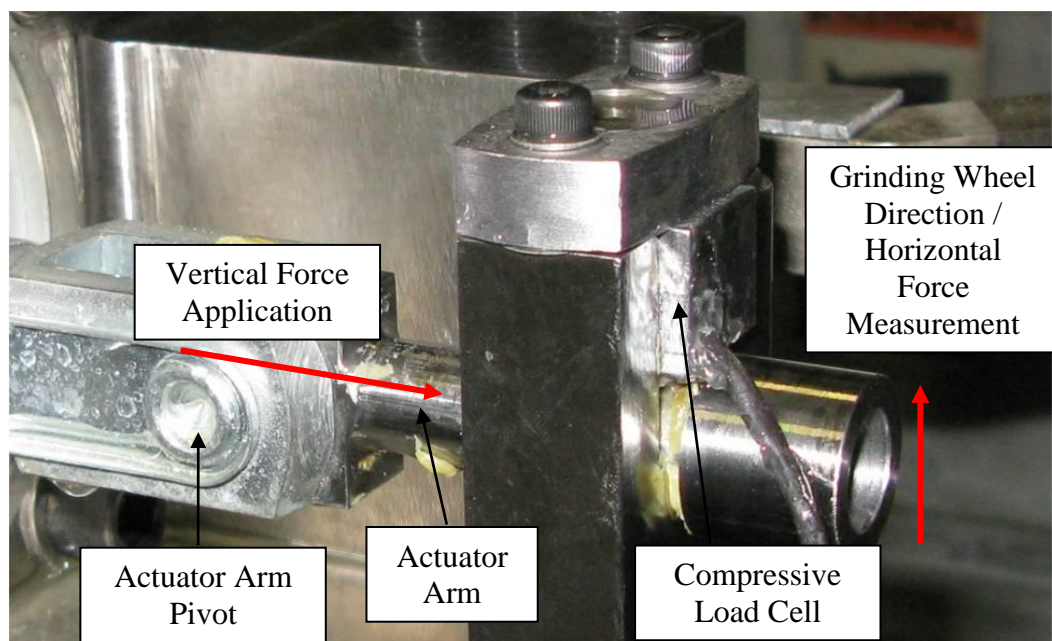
Image of pin actuator arm and load cell assembly detailing force measurement on test rig.
